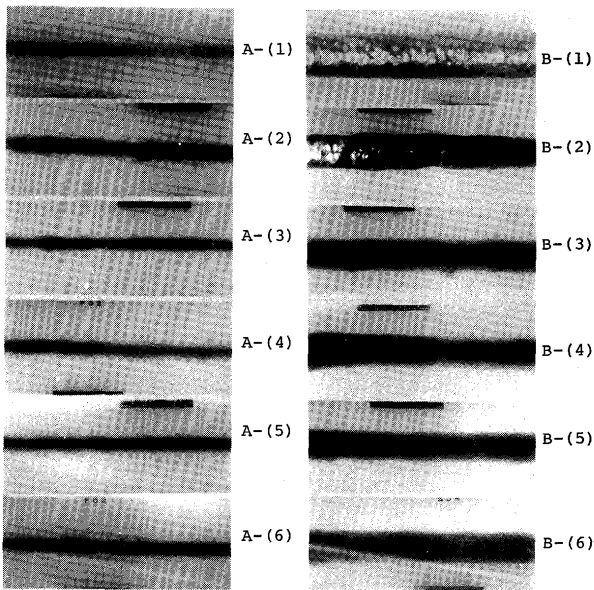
X-ray photograph of weld bead in CO₂ arc welding.
